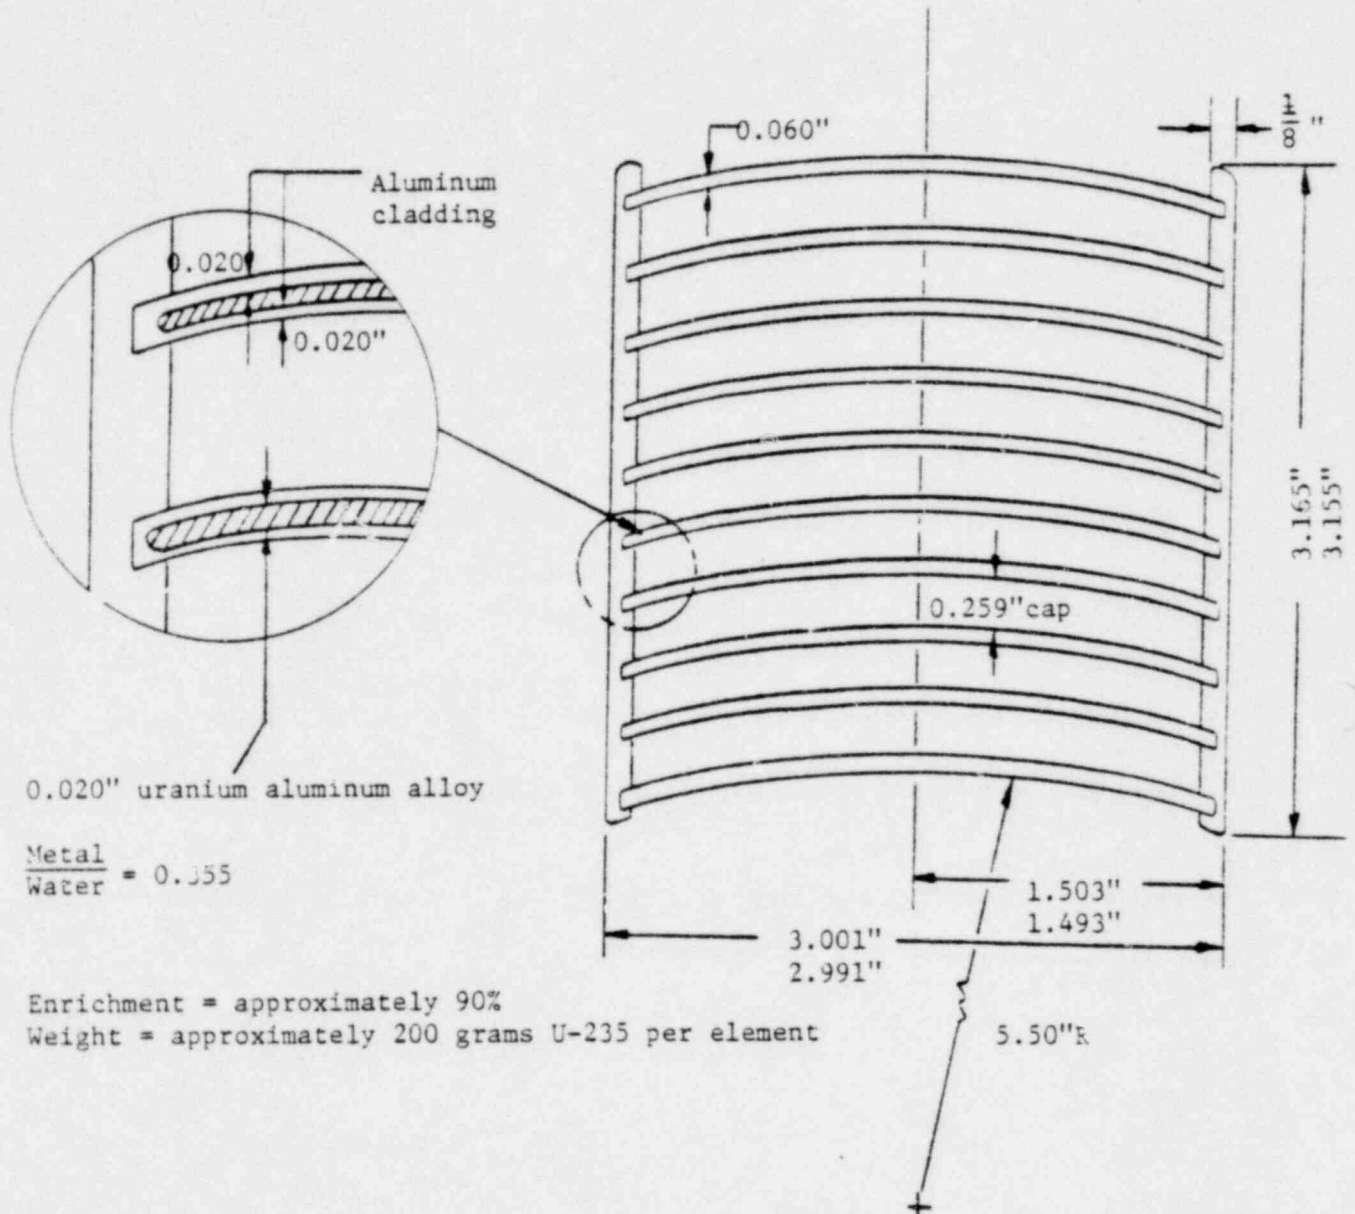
STANDARD FUEL ASSEMBLY FOR BATTELLE RESEARCH REACTOR
